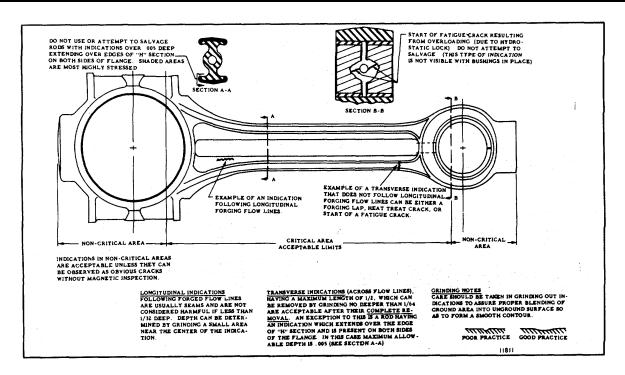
Magnetic Particle Inspection Limits for Connecting Rod
